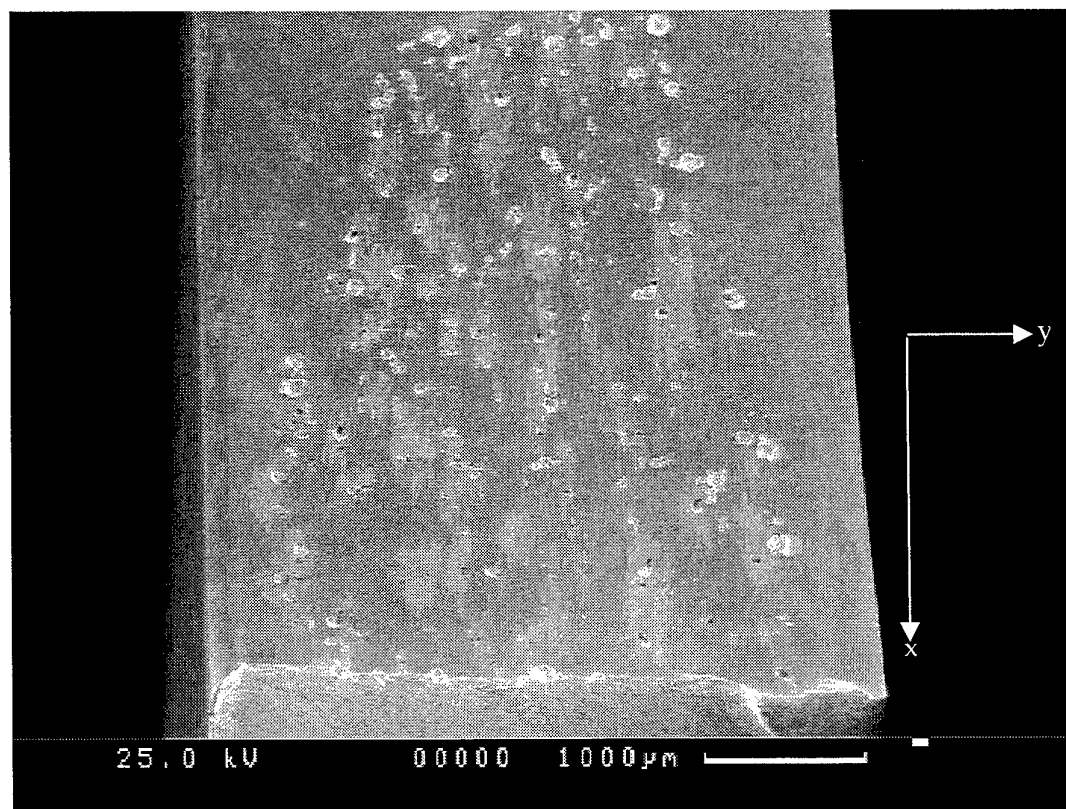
Pitting corrosion on radius of oval hole coupon. Fracture plane was in high stress location.
